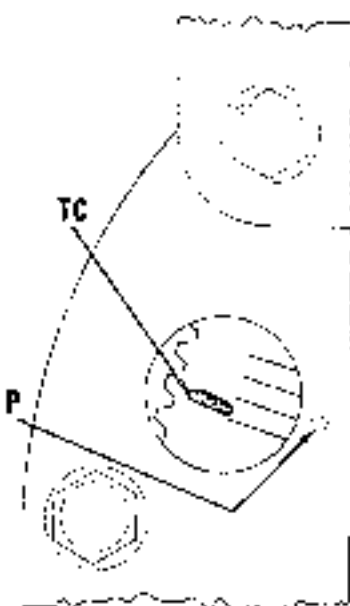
Distributor timing mark is indicated on flywheel face by painted mark PC as shown.
